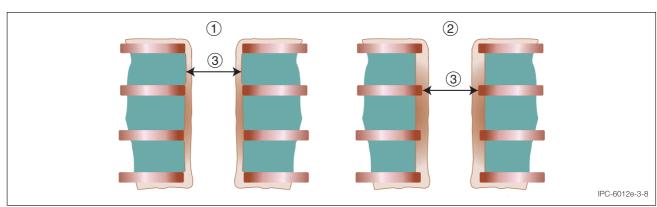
Plated Hole Microsection (Grinding/Polishing) Tolerance
